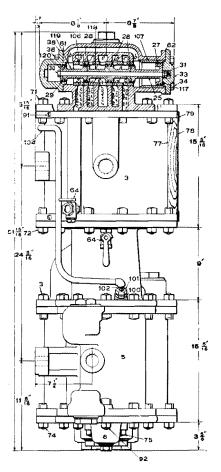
81-INCH CROSS COMPOUND COMPRESSOR. SIDE ELEVATION.
